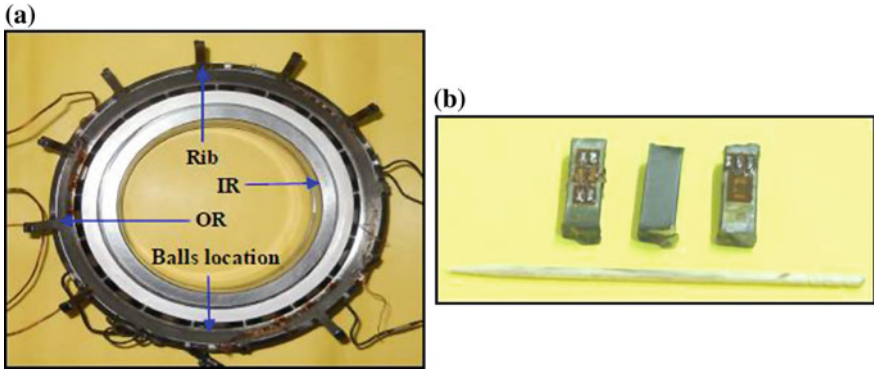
Photograph showing a rib, inner race, outer race along with balls intact of the failed bearing cage; b the separated ribs
